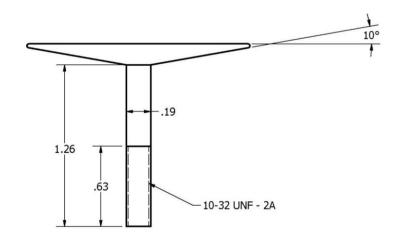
of Spindle Used to Modify the Original Air Injection Probe.
